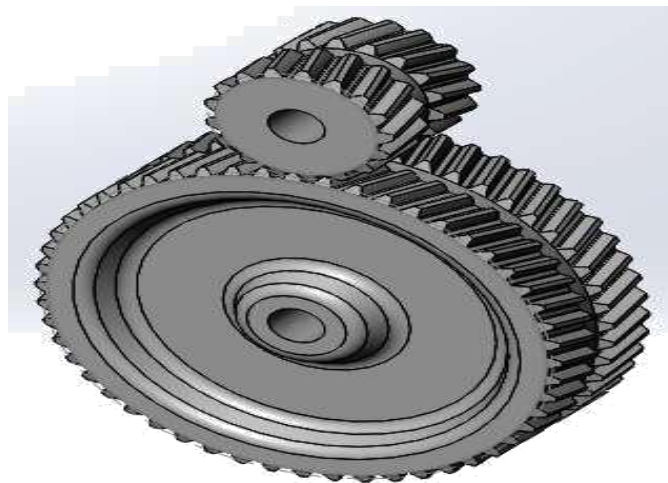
3D Model Assembly of Gear with Groove and Taper Edges Module 12 Gear Dia 675
